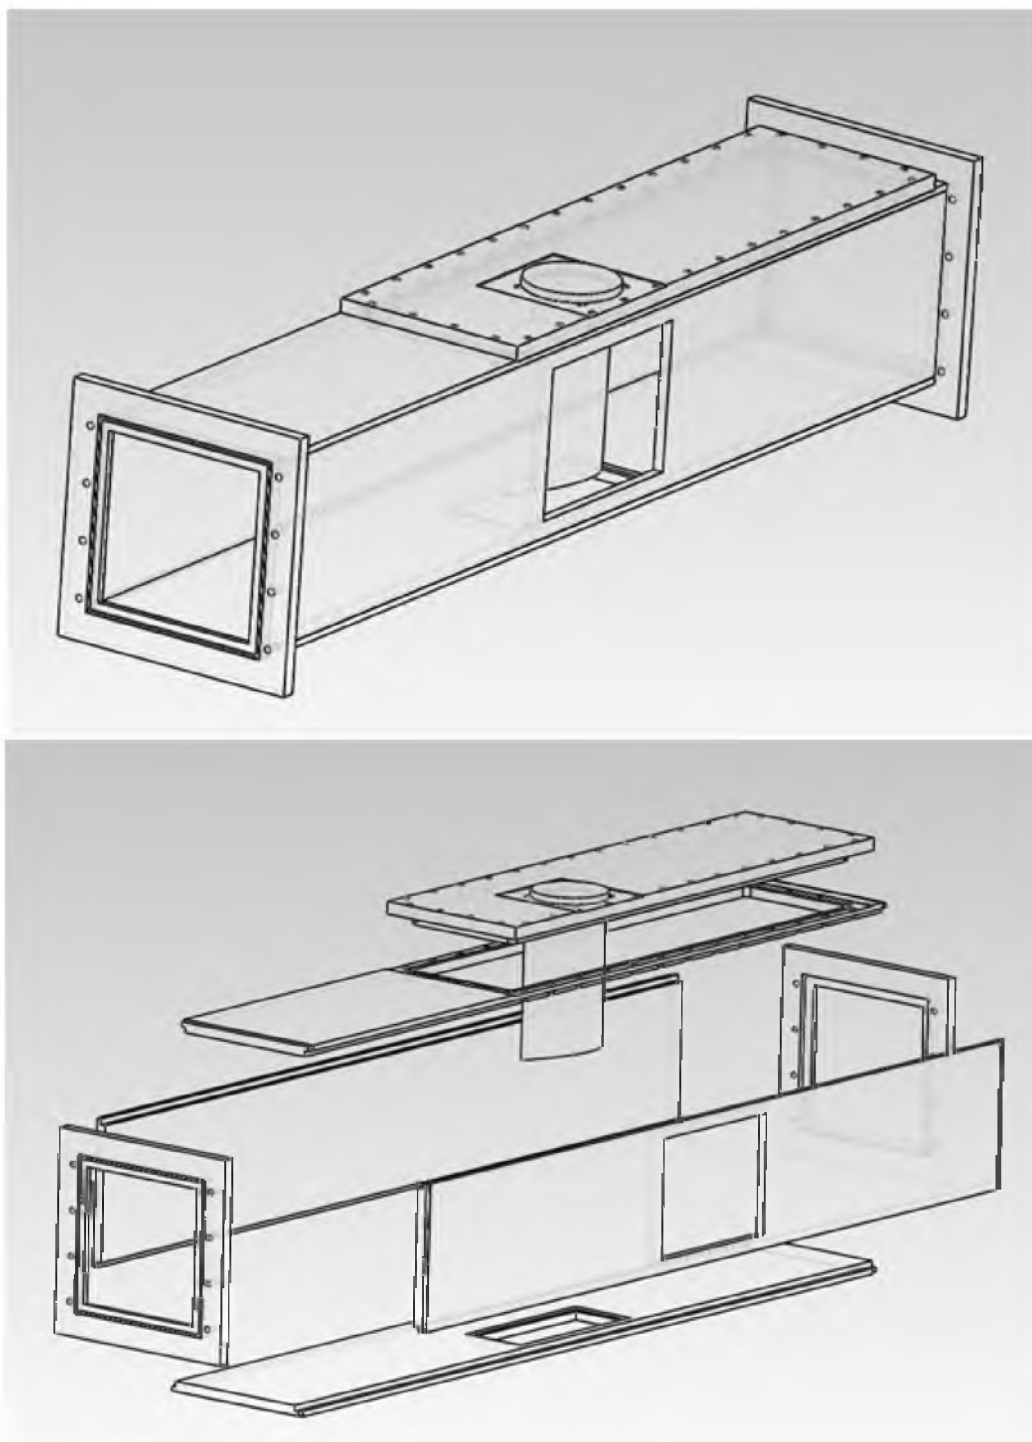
SolidWorks assembly of test section. a) (above) regular view. b) (below) Exploded to enhance detail.
